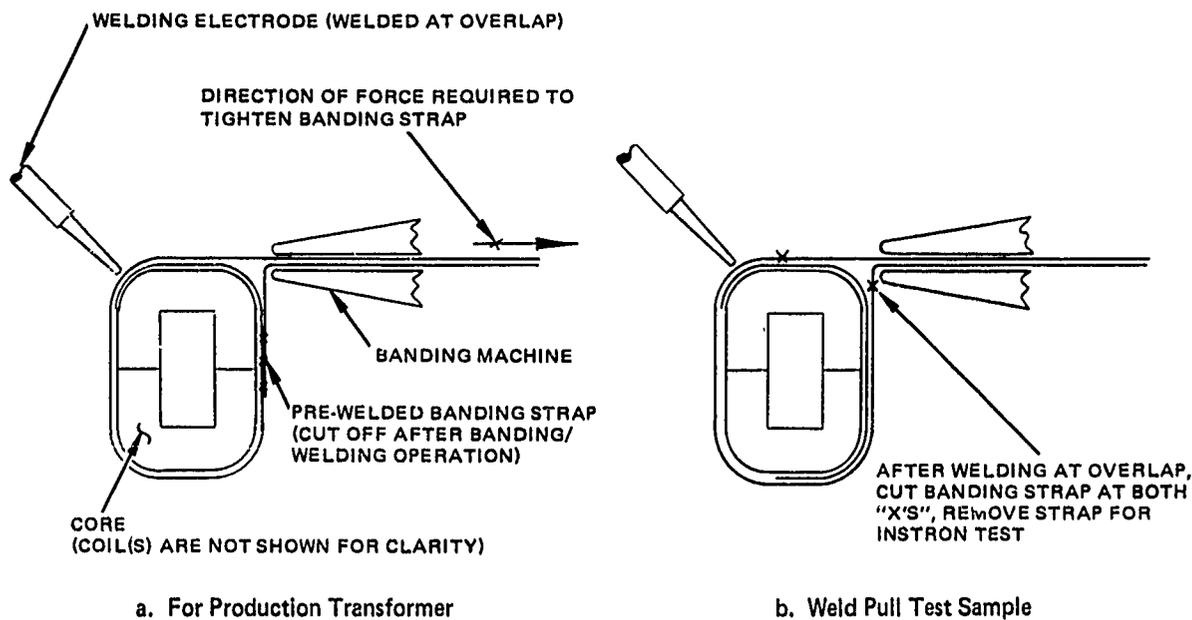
Welded band configurations for production and pull tests.
